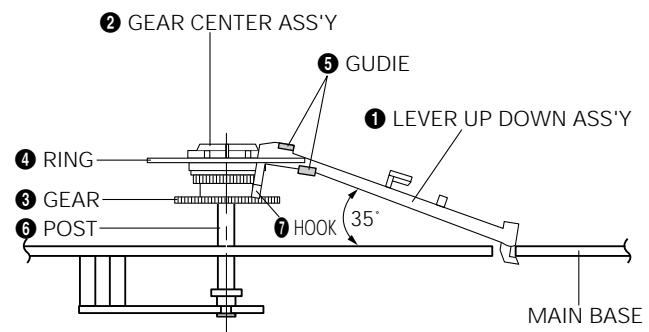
Assembly of Lever Up Down Ass'y, Gear Center Ass'y
